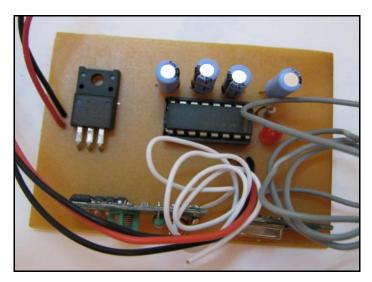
After solder (device for receiving or transmitting from/to PC part)
